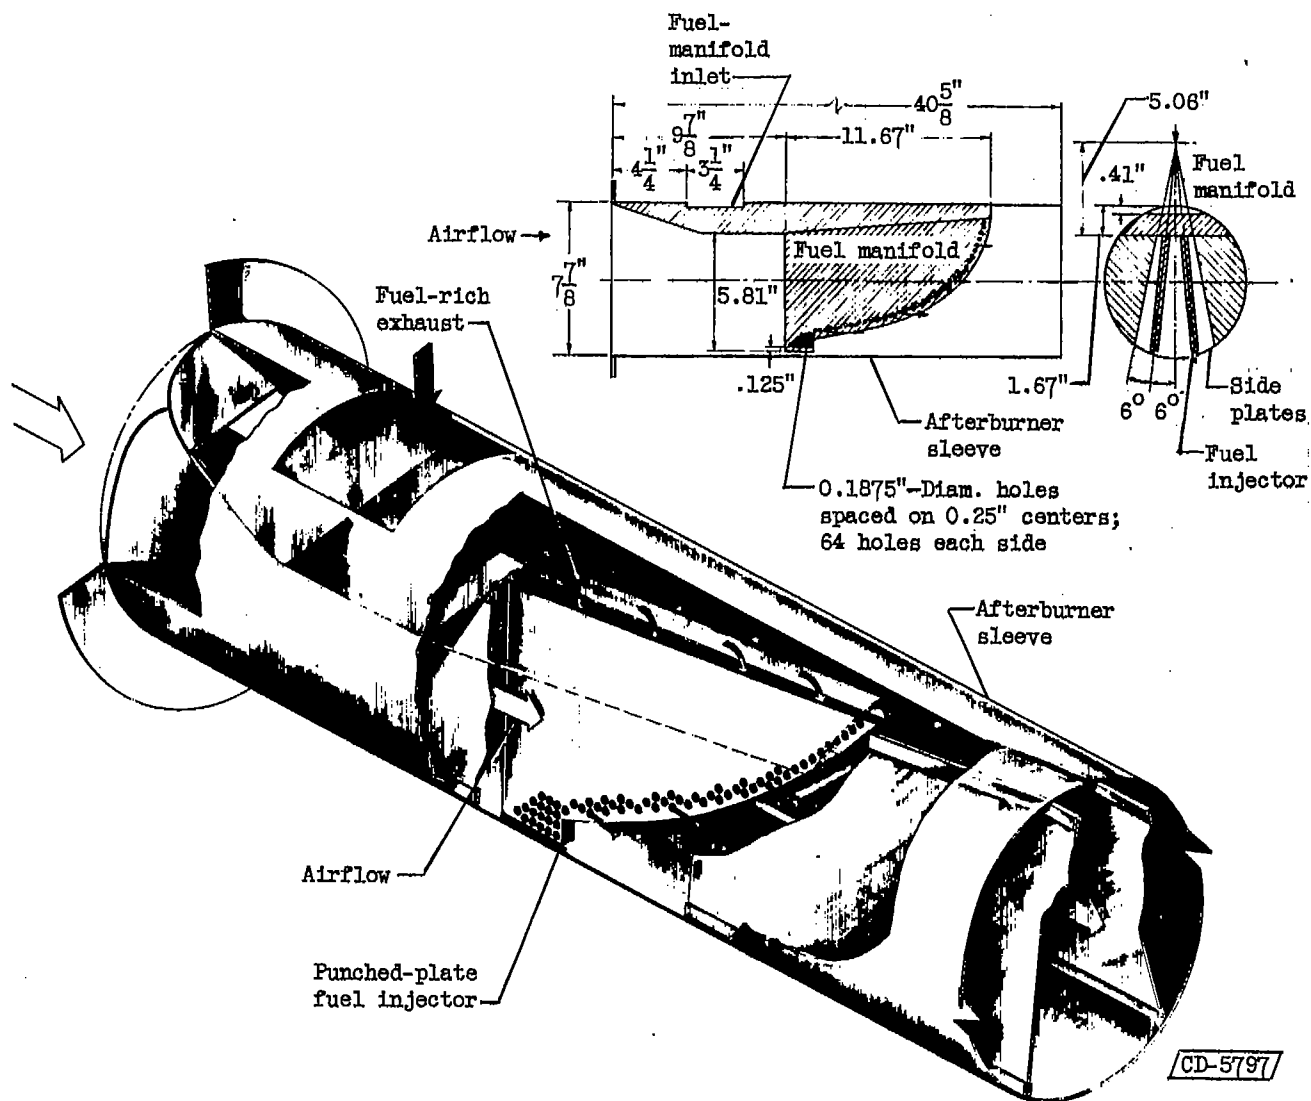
Cutaway view of afterburner flameholder configuration 5.
